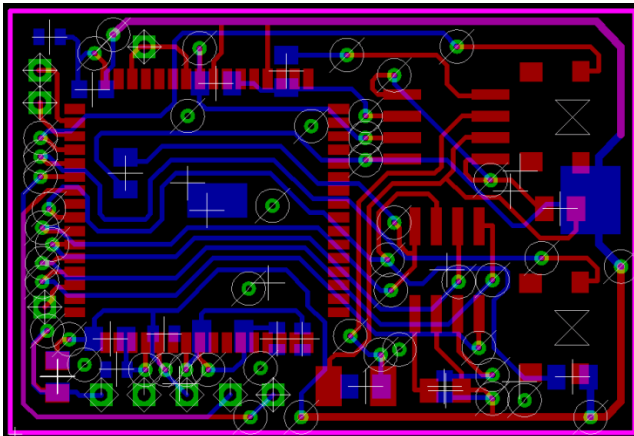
PCB – Top/Bottom Layer plus Vias and Pads and Holes
